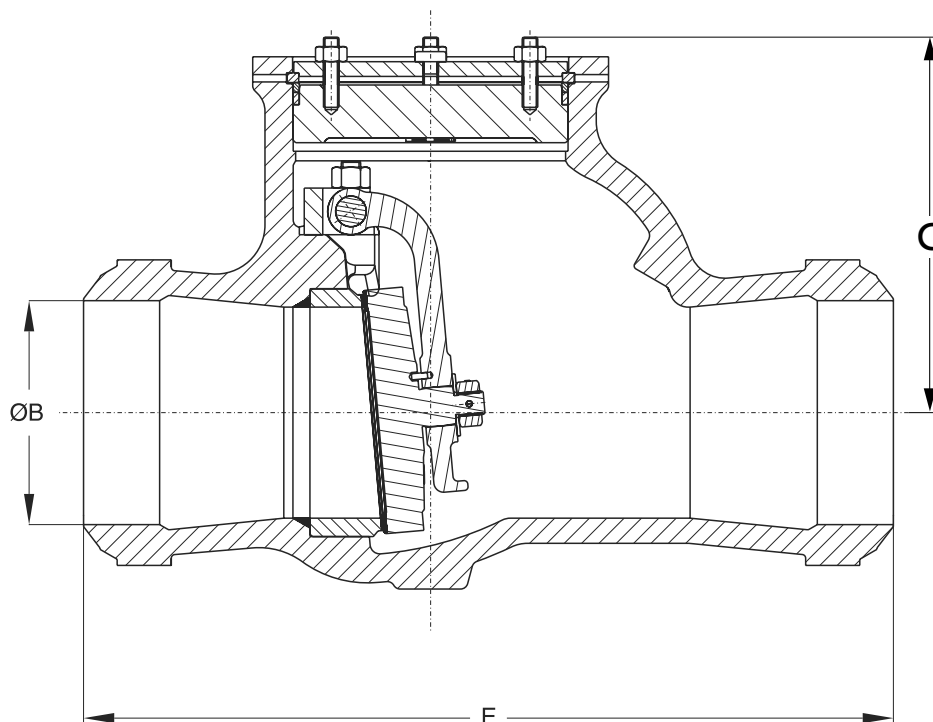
Sectional drawing of SICCA 900-3600 SCC
